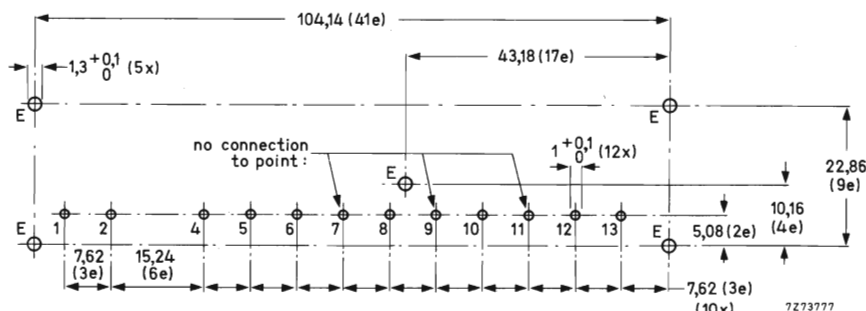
Piercing diagram viewed from solder side of board; $e = 2.54 \text{ mm}$ (0.1 in).
